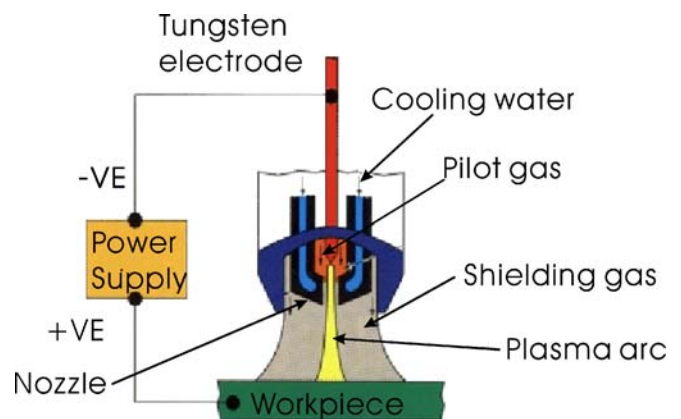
Schematics of the plasma arc welding (PAW) process
